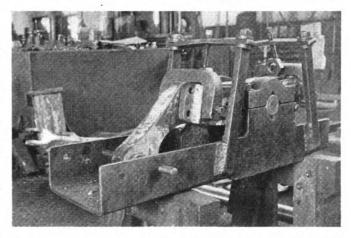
Link jig with link and link cheeks in position for reaming holes
